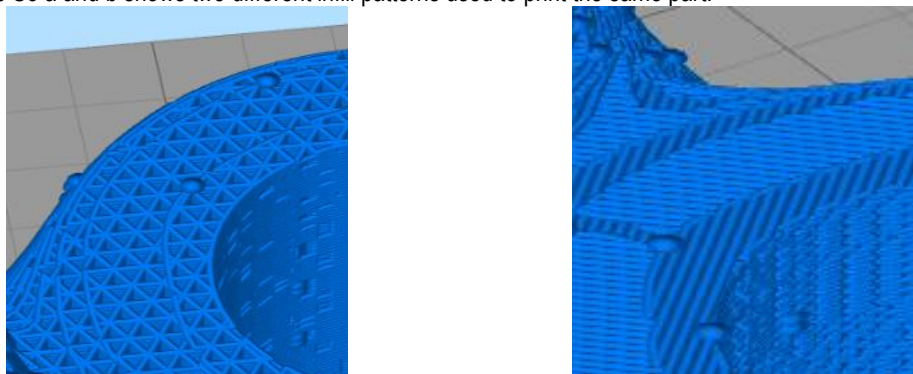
3D printed part fabricated with a. triangular and b. rectilinear (0/90°) infill pattern
